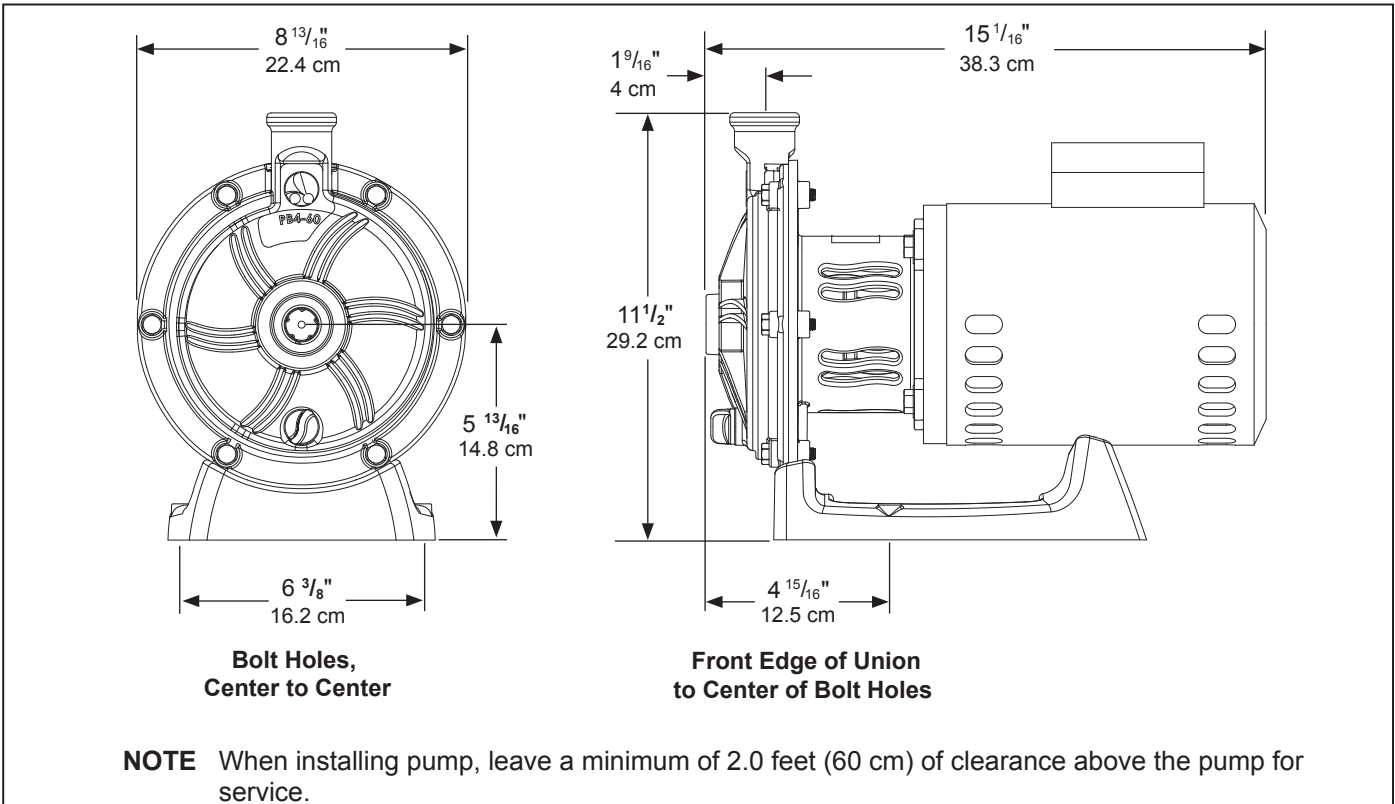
Polaris PB4-60 Booster Pump Dimensions
